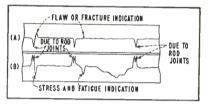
Records produced by pipe tester. Joints cause discontinuities
